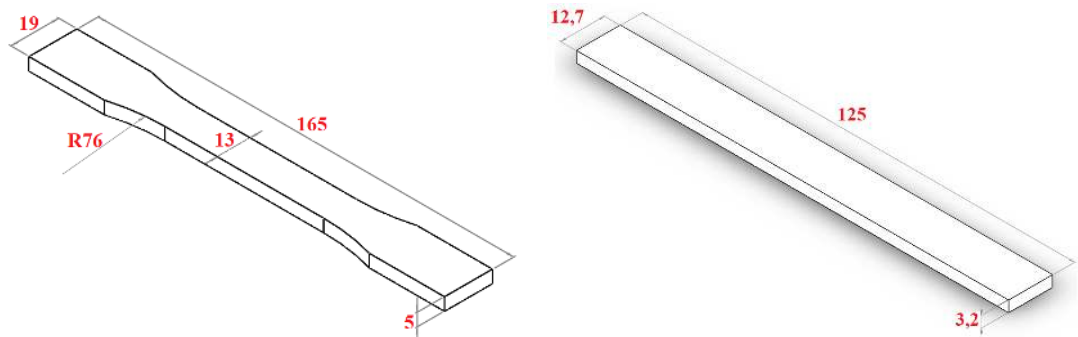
3 Shape and dimensions of specimens for a) tensile test, and b) bending test
